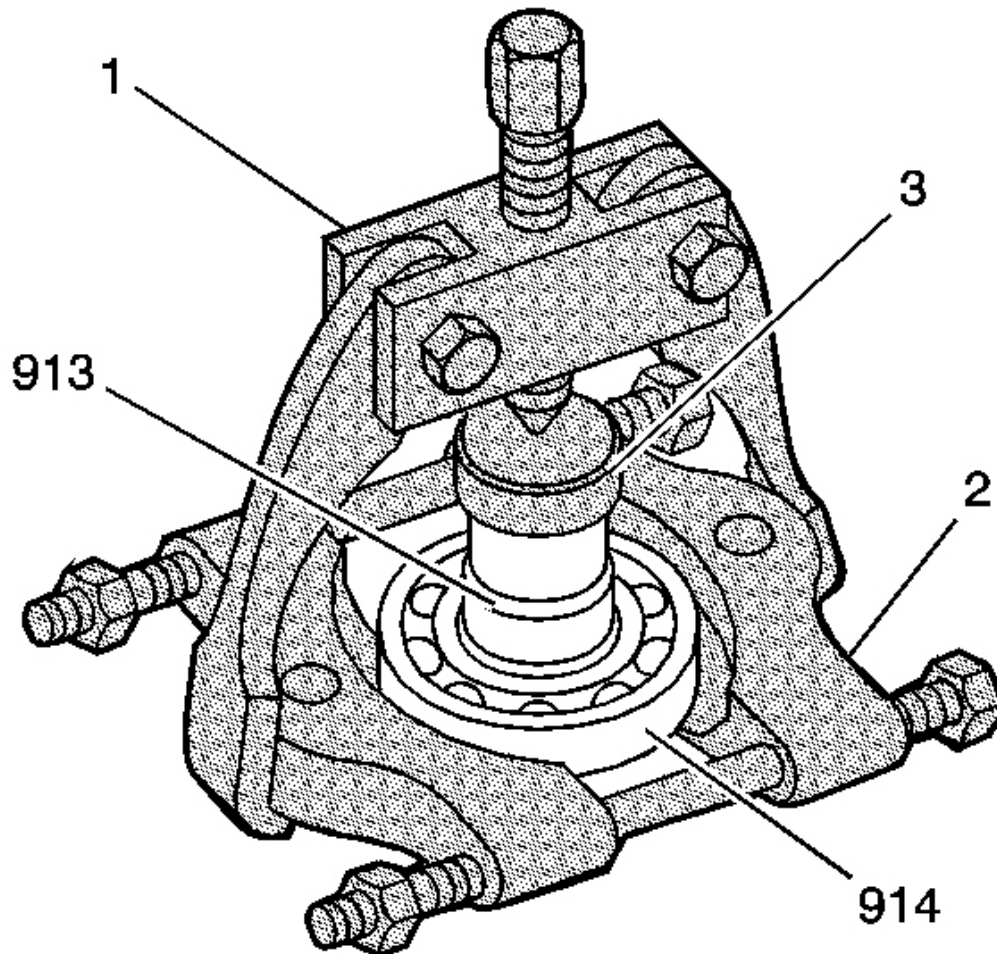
Removing The Transfer Case Input Gear With Shaft Front Bearing From Transfer Case Input Gear Assembly Using DT 46424 & J 22912-01
